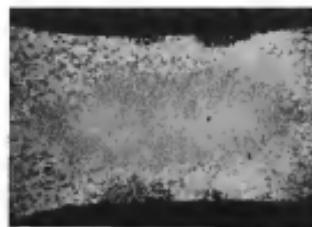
Longitudinal section of spot weld through two pieces of 515W sheet from which the oxide film was removed previous to welding.
